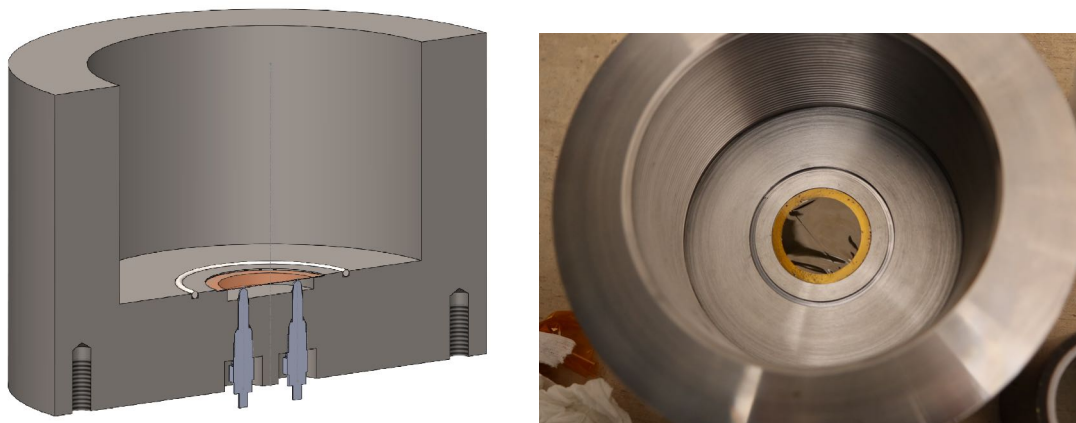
Left: Cutaway view of assembled igniter end cap subassembly (thermite not shown). Right: Thermite installed/taped in igniter.
